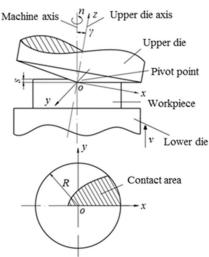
Schematic diagram of rotary forging of a cylindrical workpiece [3]
